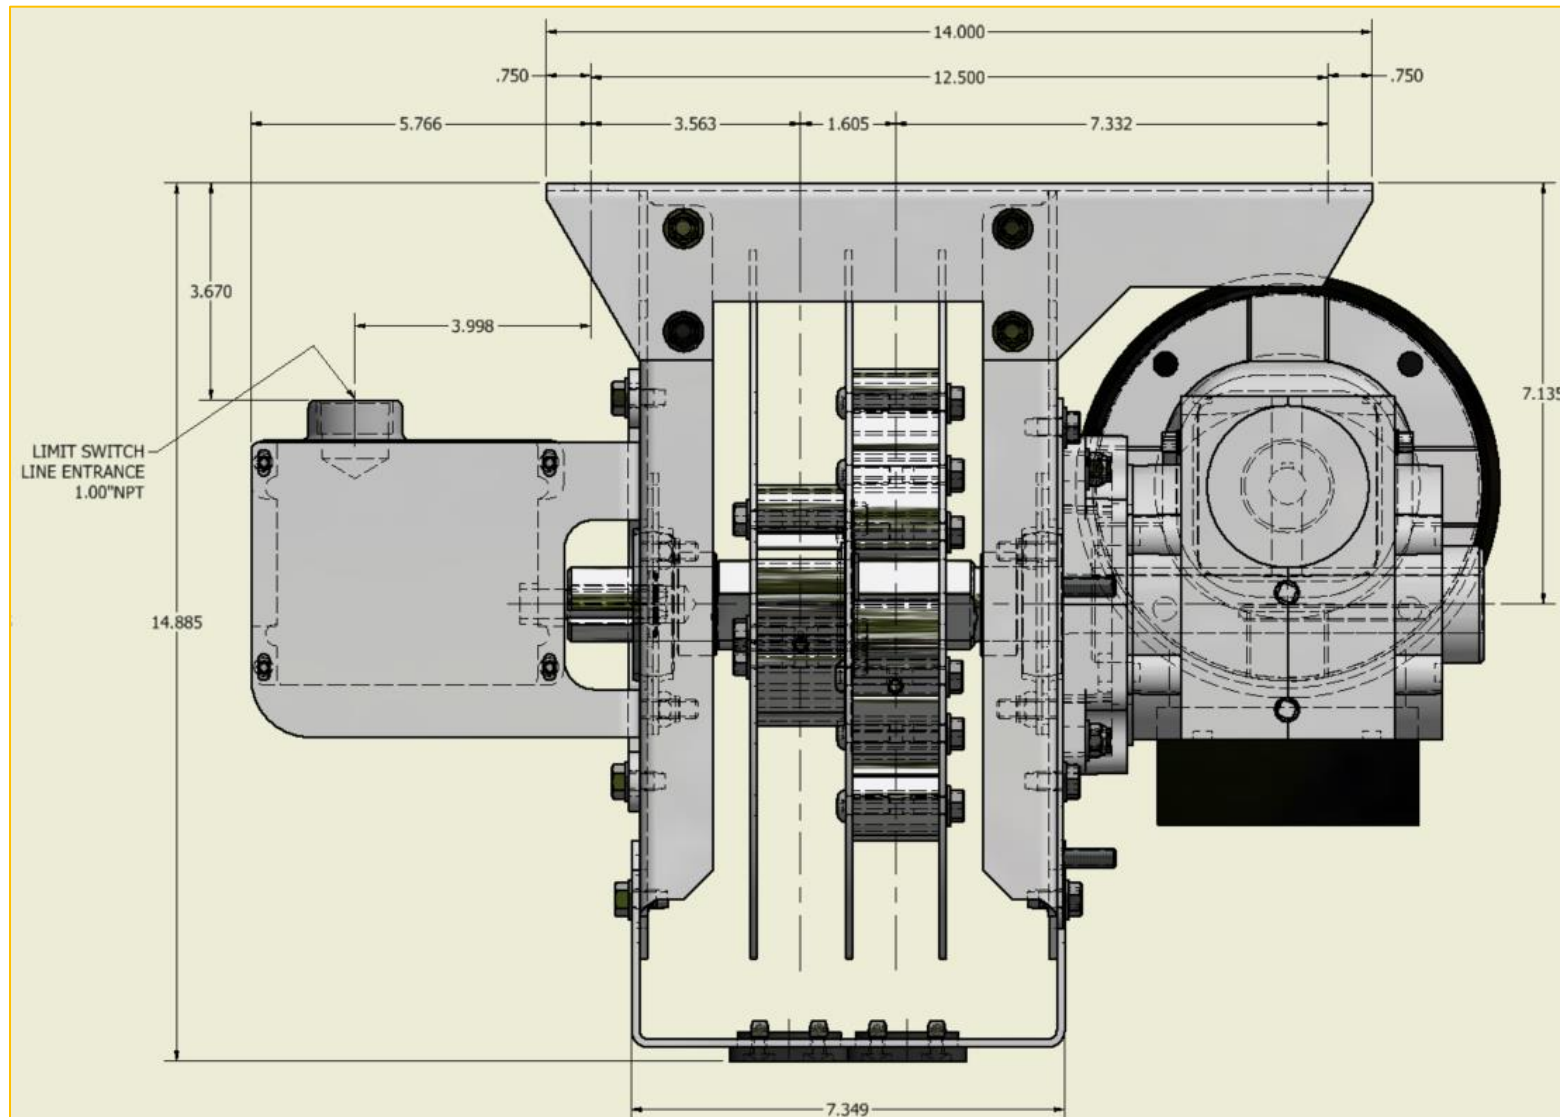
Dual Wire Rope Motor—Overall Reel Dimensions
